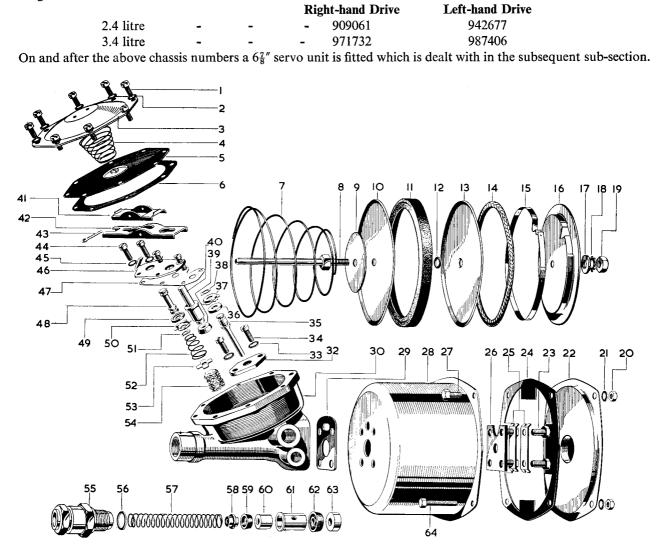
Exploded view of the $5\frac{1}{2}^{"}$ vacuum servo unit.
